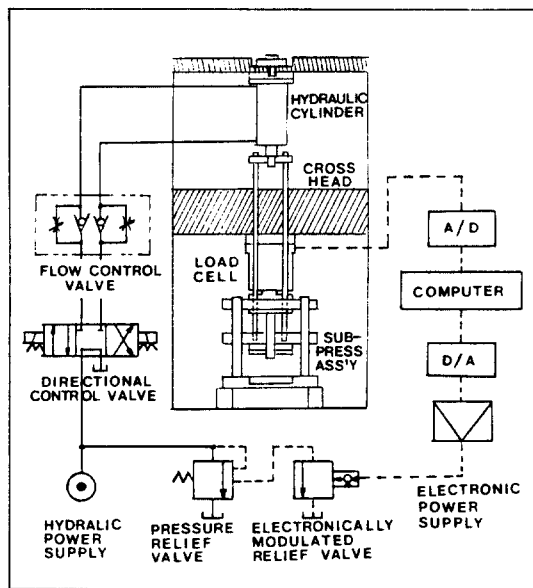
Schematic diagram of the hydraulic control system for blankholder force control. Blankholder speed and force are controlled by a flow control valve and a pressure relief valve combined with a electrically modulated relief valve, respectively.
